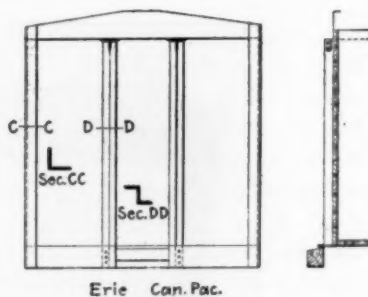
STEEL END FRAMING USED ON THE ERIE AND CAN. PAC. CARS WITH Z-BAR CENTER POSTS; NO DIAGONAL BRACES.
